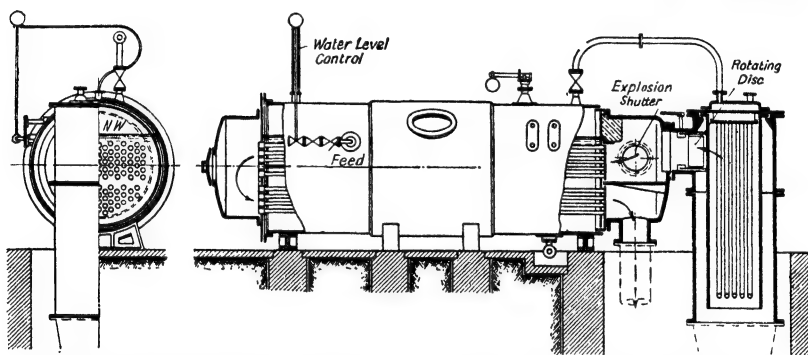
Exhaust-heat Boiler with Double Draught for Gas Engine with a Superheater inserted in Exhaust Pipe
